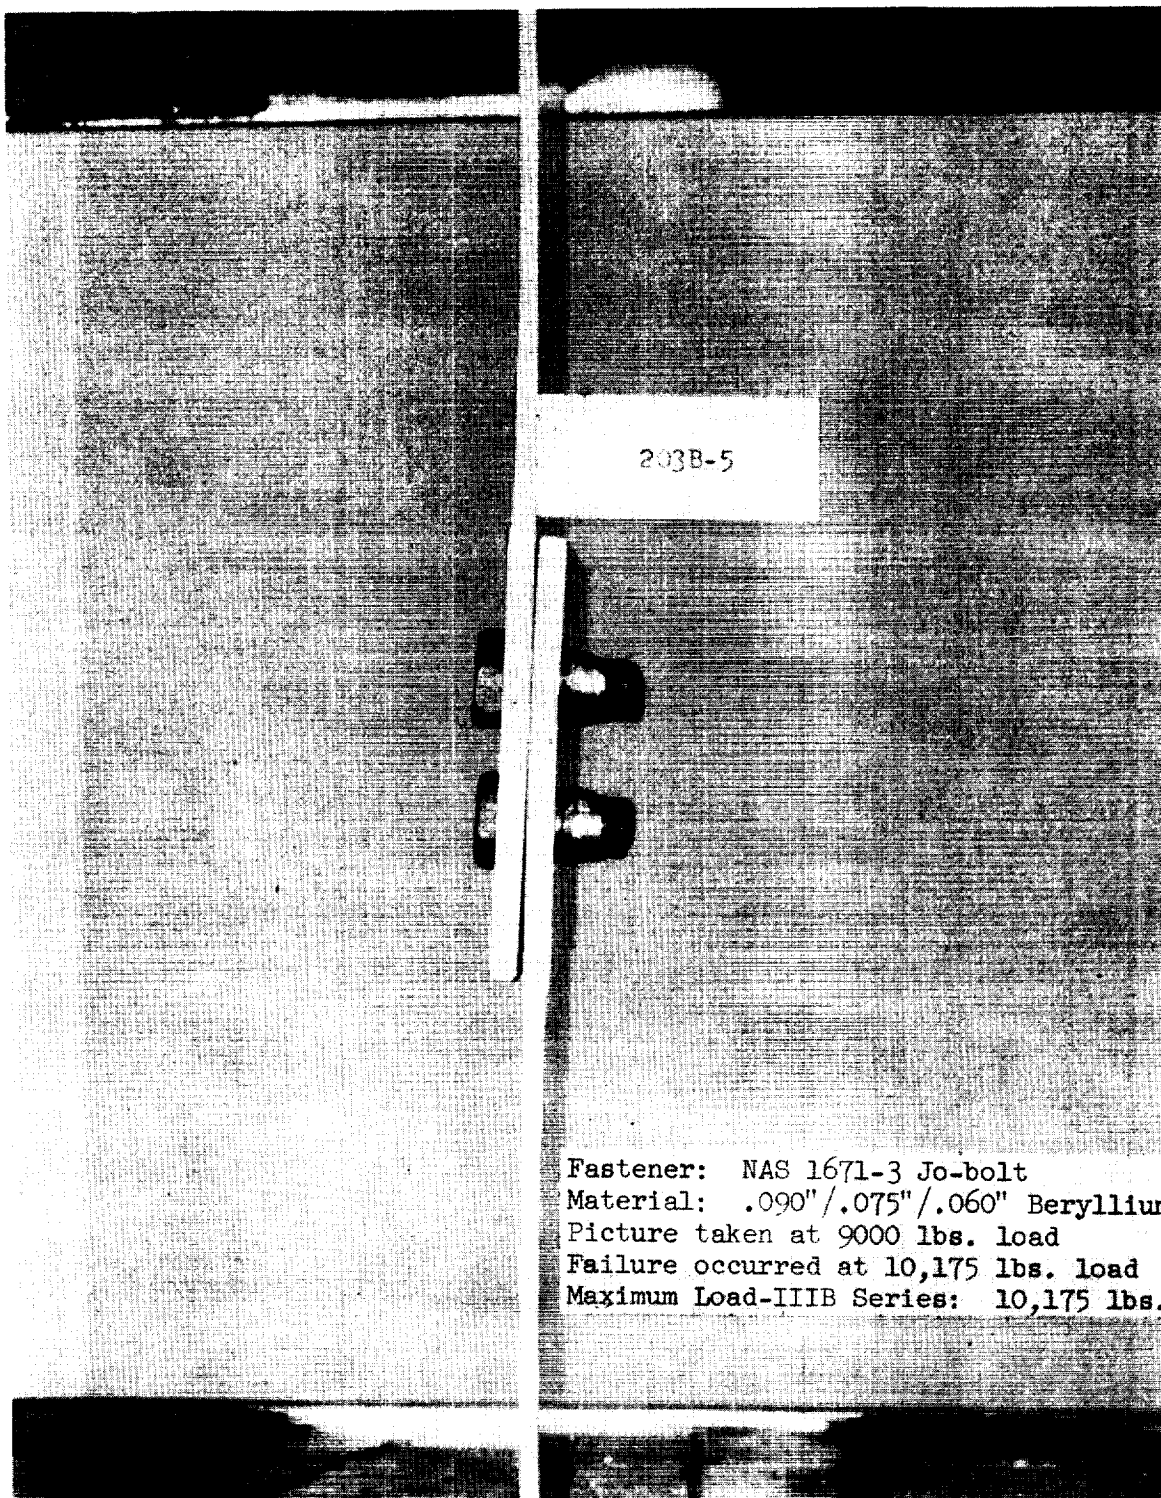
TYPE IIIB SPECIMEN - TENSILE TEST
